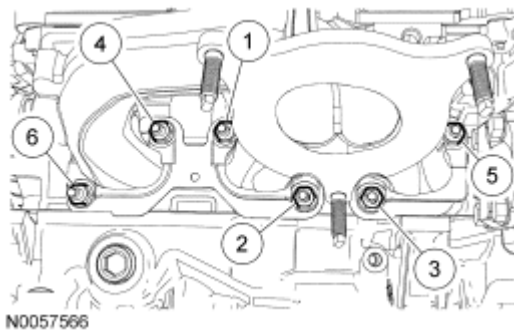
Identifying Tightening Sequence Of RH Exhaust Manifold Nuts
